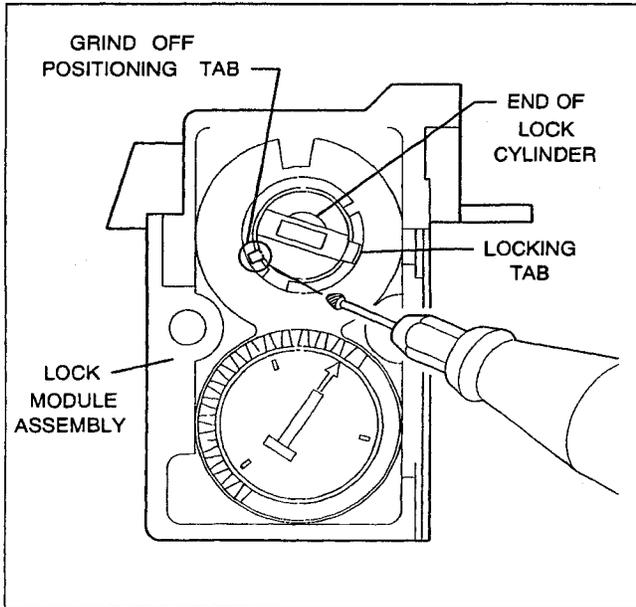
Grinding Off Lock Cylinder Positioning Tab
